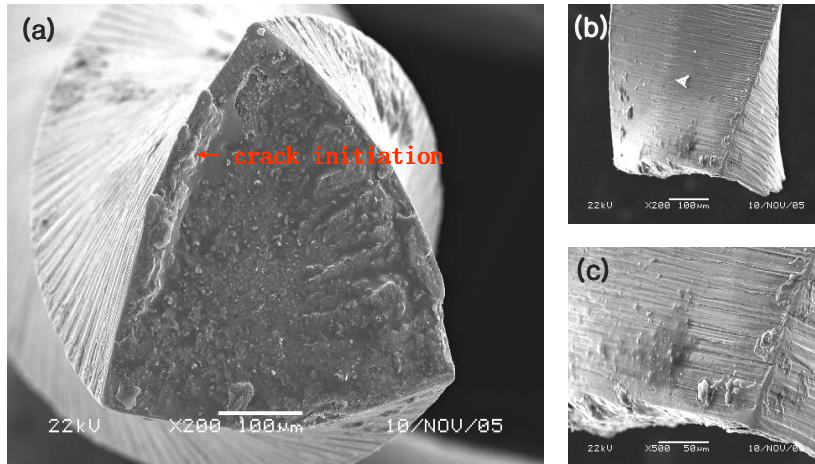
SEM and EDS showing the fractured surface morphology of Ni-Ti file fractured at the lower part after clinical use. (a) fractured surface (b), (c) lateral face (X 200, X 500)
